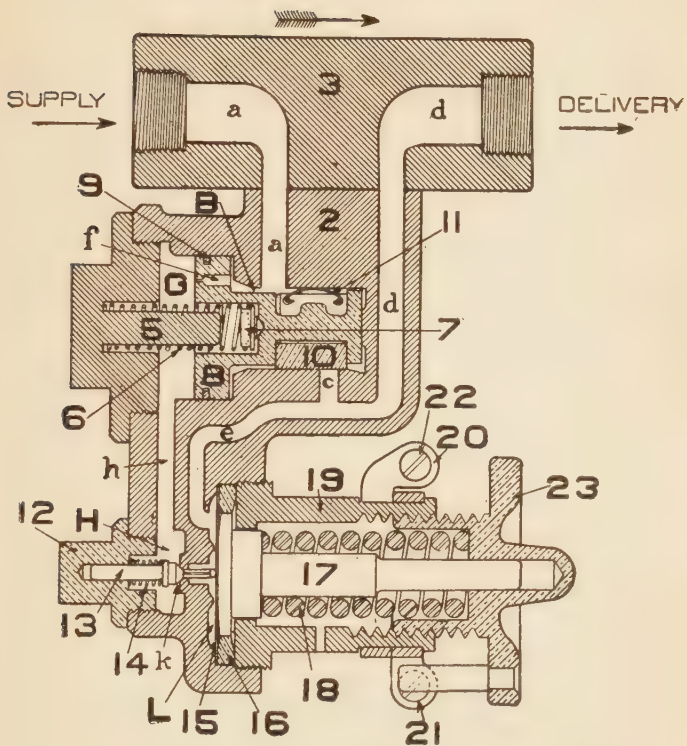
DIAGRAM OF FEED VALVE, CLOSED
